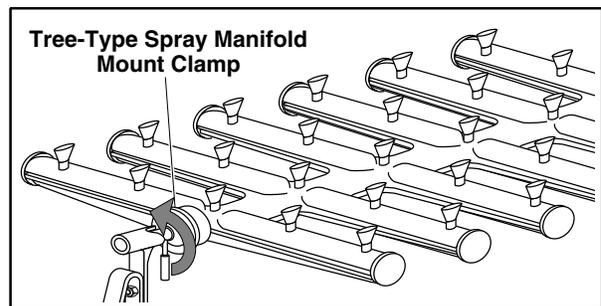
Tree-Type Spray Manifold Mounting Clamp Handle
